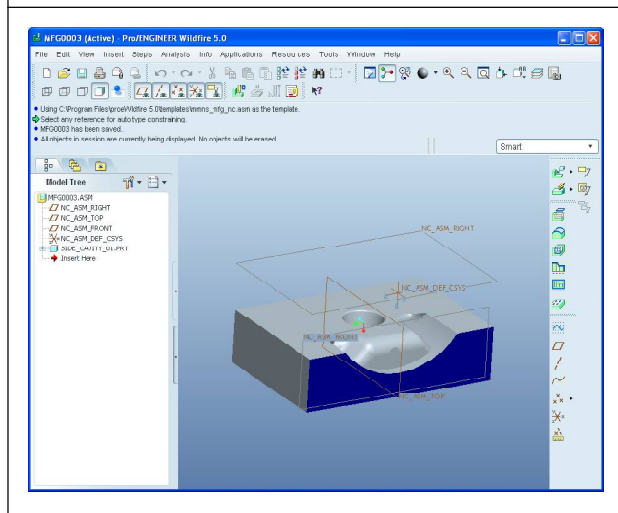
Side Cavity in Manufacturing (NC Assembly) Module
